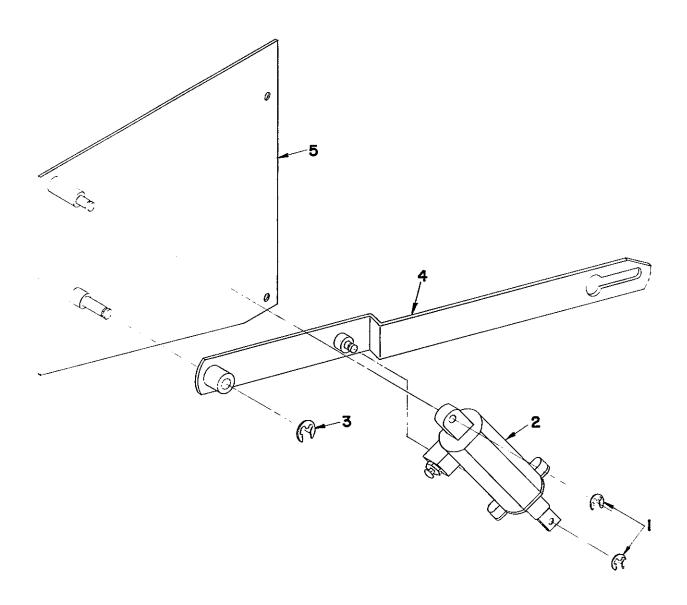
CUP DOOR DAMPENING ASSEMBLY
